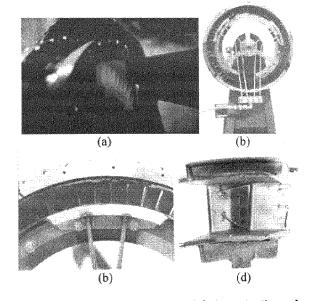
Hardware for thermal fatigue testing of NGVs in burner rig: (a) and (b) specimen fixture and cooling arrangement; (b) close-up of specimens mounted in fixture; (c) fine wire thermocouples spot welded on air foils for temperature calibration
